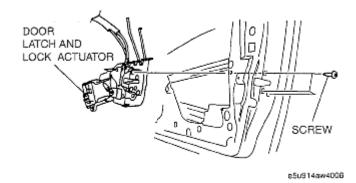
Identifying Door Latch And Lock Actuator Courtesy of MAZDA MOTORS CORP.
